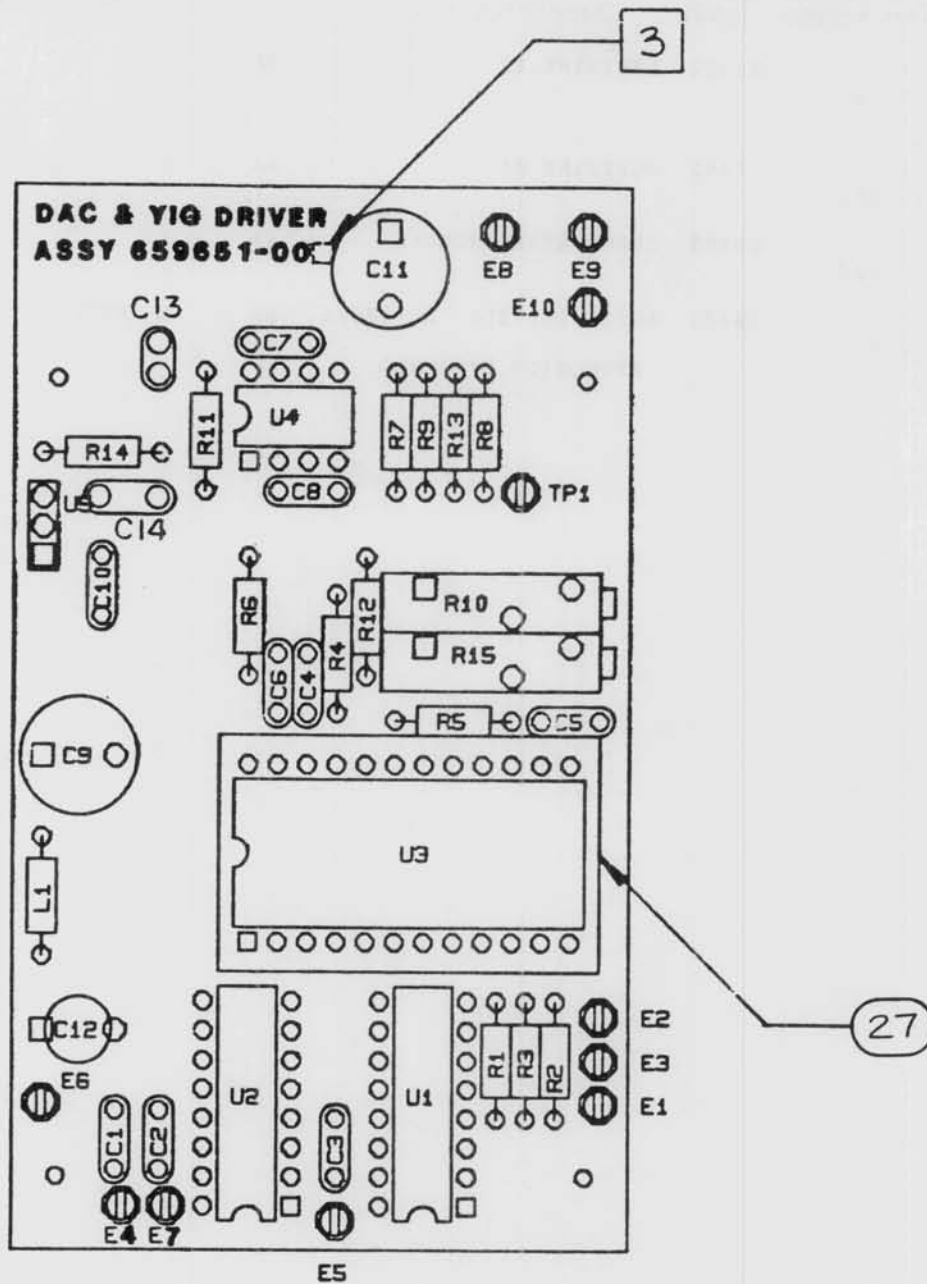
YIG Assembly A2 Parts List, Part No. 659859
